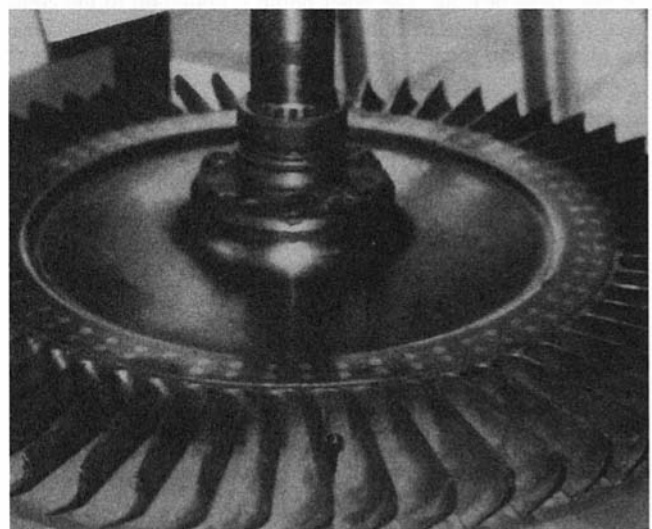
Uncooled turbine blades held by pins and brazed to disk. A special supply of cooling air was directed to the blade roots to maintain the strength of the soldered joint. The splined shaft coupling can also be seen. Each blade weighed 12.25 oz. Rivet diameter was 11 mm. Estimated maximum centrifugal stress  $\approx$  18,000 psi and gas bending stress  $\approx$  3000 psi. Later models had air-cooled hollow blades.
